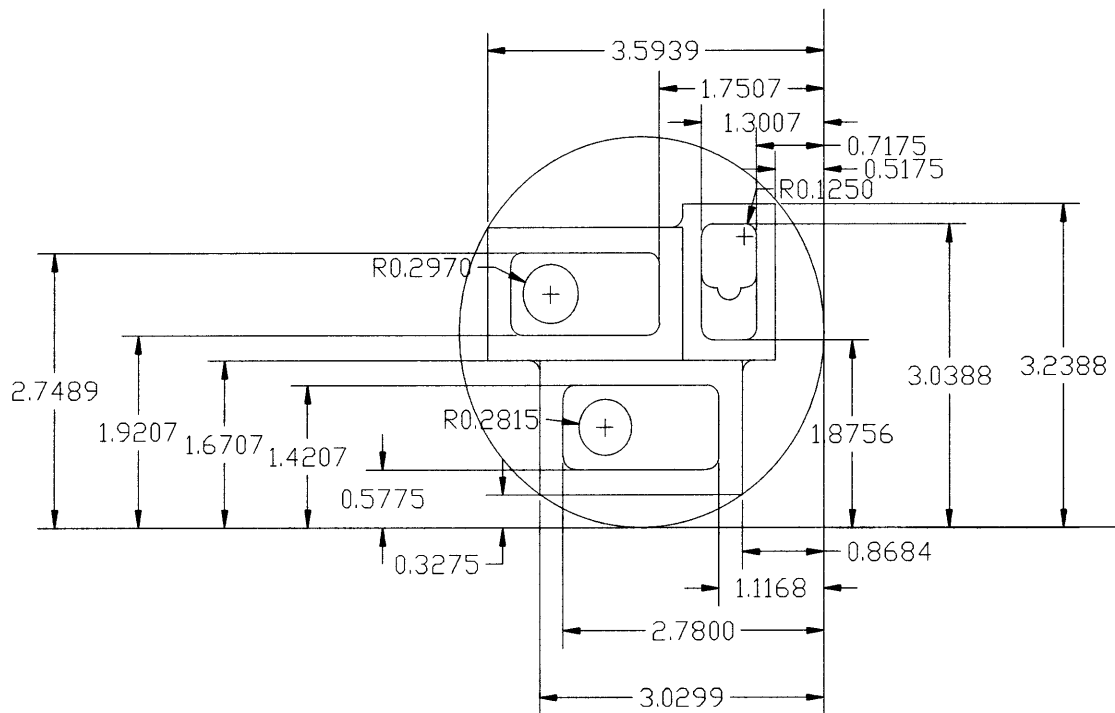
CAD Drawing of Test Article for Servos (dimensions in inches)
